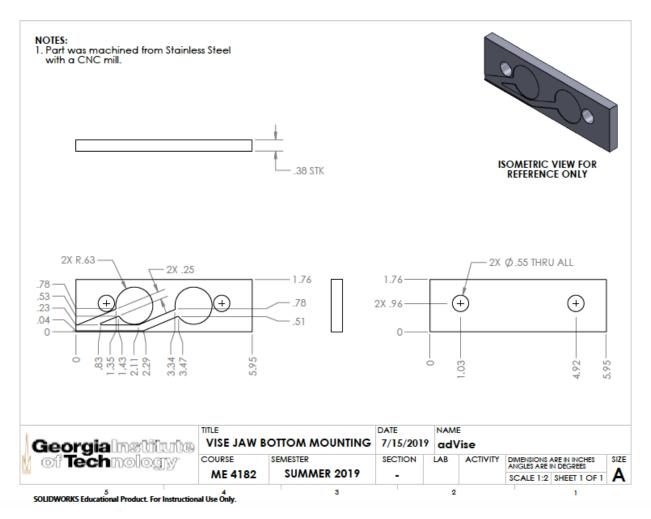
Bottom Mounting Plate for Vise Jaw Assembly.
